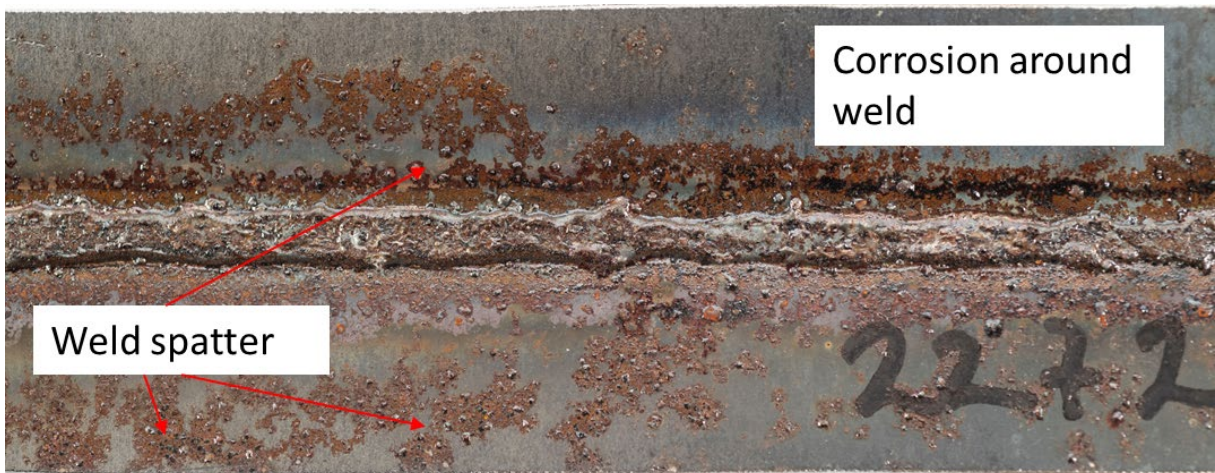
Photograph showing widespread corrosion around the weld and heat affected zone
